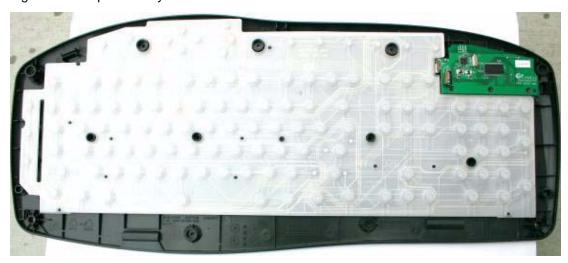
shows the keyboard with the top removed. The radio/ enCoRe II LV board (PDC-9265) is shown in the upper right hand corner.
